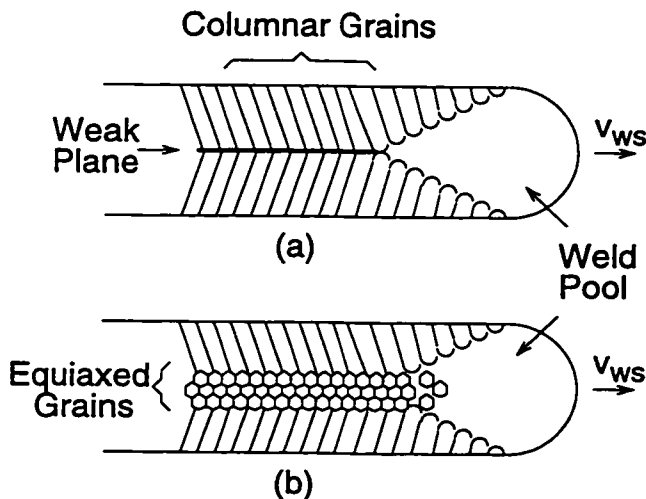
Solidification of a weld pool with (a) columnar grains and (b) a CET.
